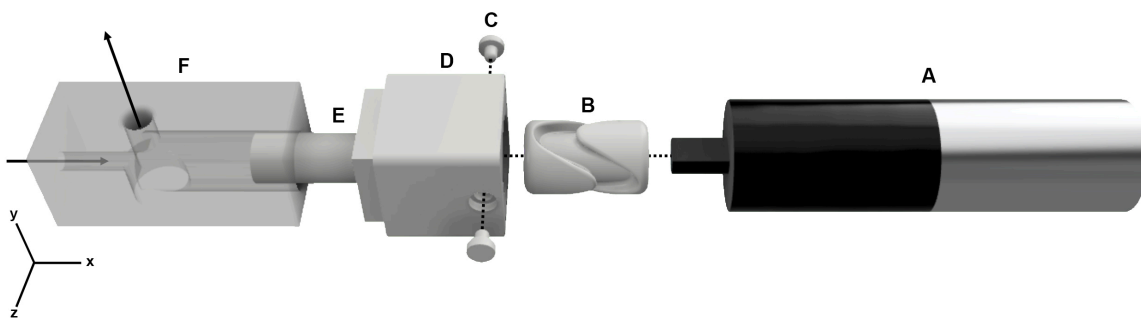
Overview of the novel drug delivery pump: A) DC motor that is used to drive the drug delivery system. B) R2L component that is used to transform the rotational motion from the DC motor to a linear one. C) Alignment keys that are used to align the R2L component inside the pushing block. D) Pushing block component that is pushed forward by the R2L component as the rotational motion is transformed to a linear one. E) Polytetrafluoroethylene (Teflon) rod that is attached to the pushing block and works as a piston to pump drug through the outlet of the valve. F) VeroClear[®] valve component with inlet on the left, outlet on top and pumping chamber on the right.
